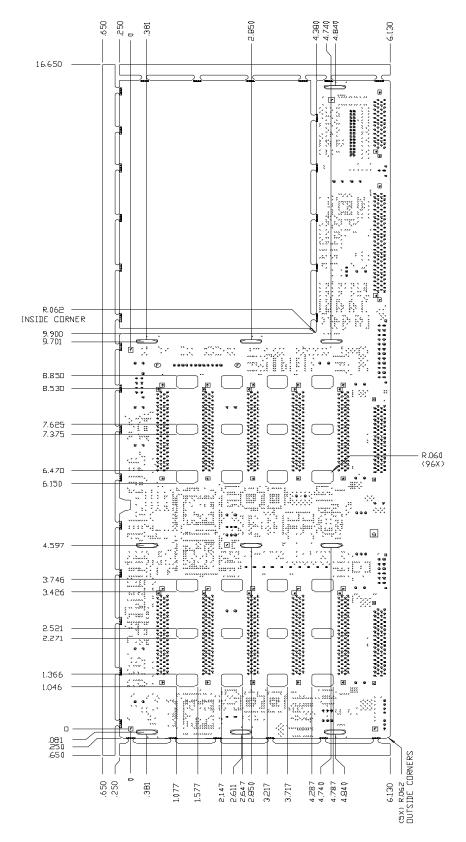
SCSI Backplane Board Component Placement (Primary Side)
